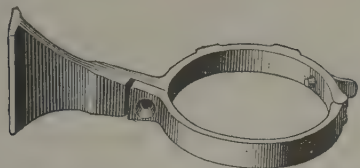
Marker or Tail Lamp Brackets. Armspear Manufacturing Company.
